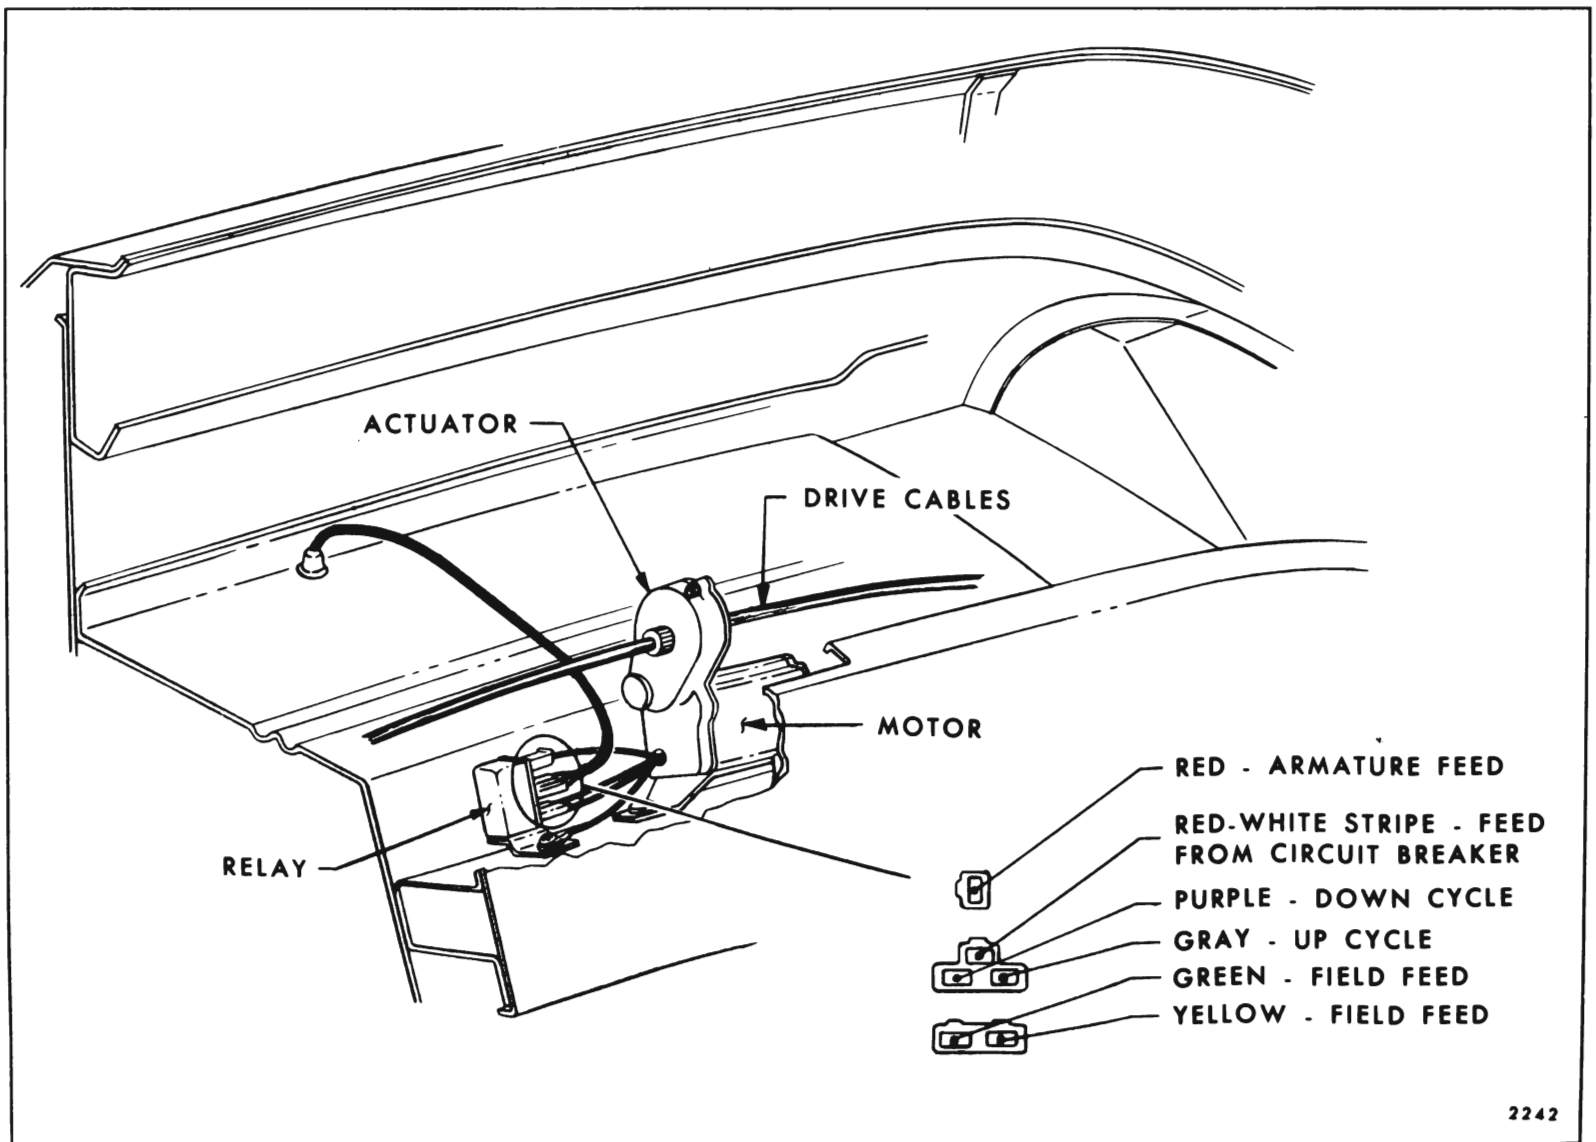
Electric Folding Top Motor and Actuator - Corvair
